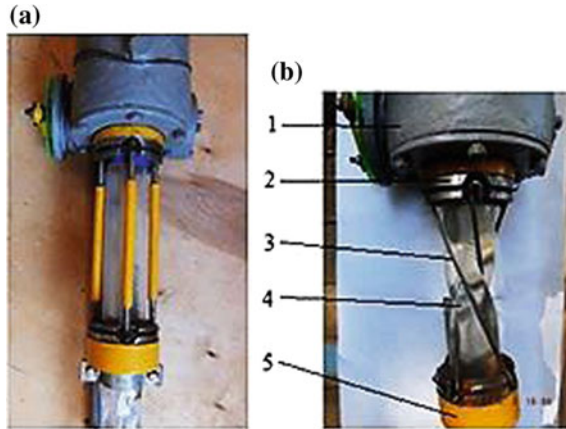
a Regulating device with a rods diameter of 12 mm; b regulating device with a rods diameter of 4 mm; 1—drive; 2—rotary sleeve; 3—rods; 4—channels; 5—sleeve
